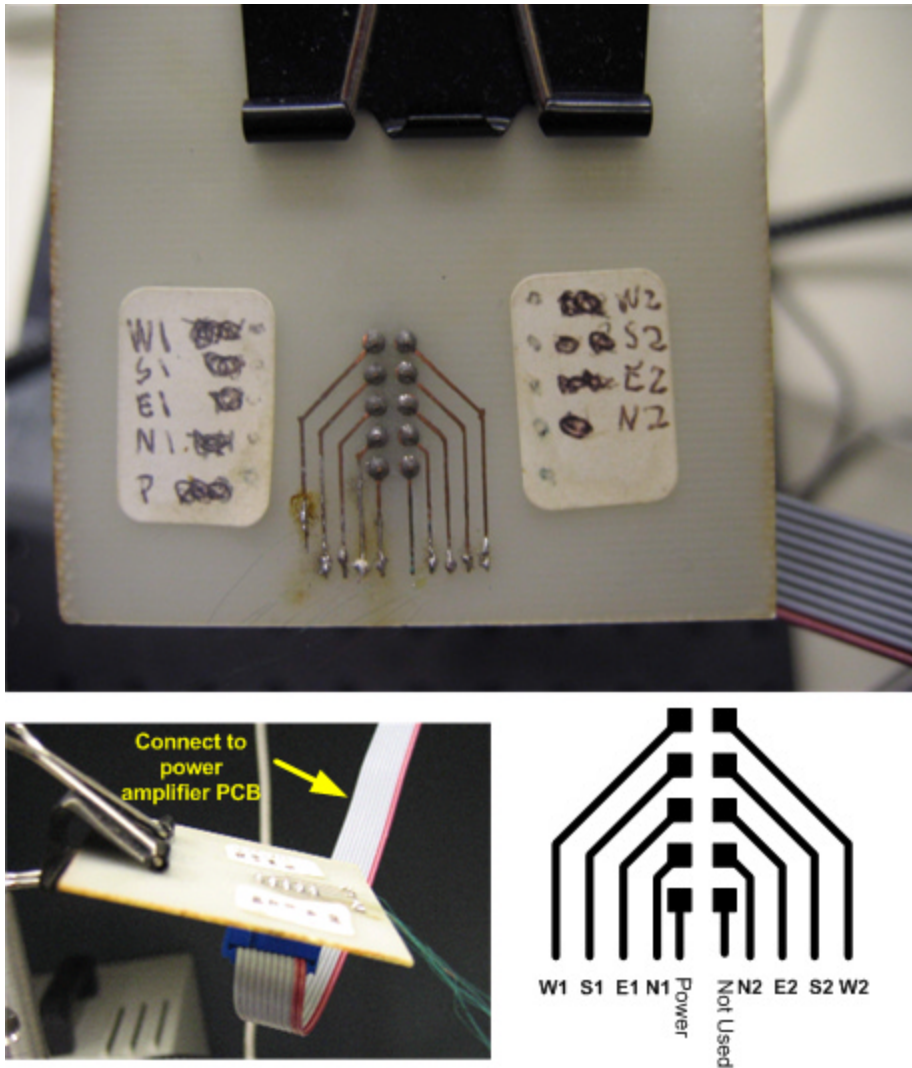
The intermediate PCB connecting the control wires and the power amplifier PCB.
